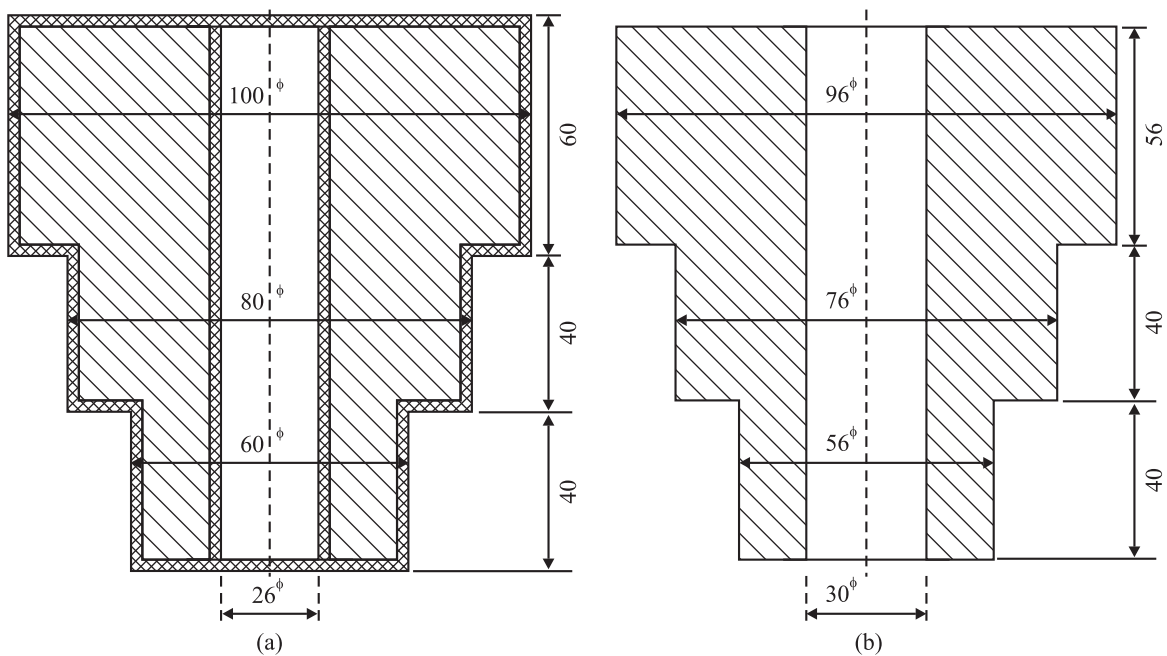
(a) Component as cast, (b) Finished component (All dimensions are in mm).
